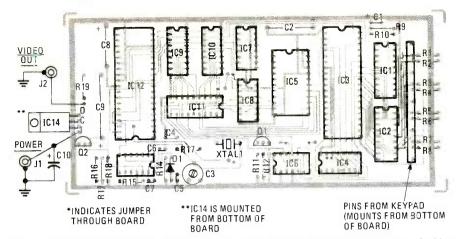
VOLTAGE REGULATOR, IC14 should be mounted from "bottom" of board and attached to vertical wall of enclosure. This will provide both heat-sinking action and a connection between chassis and board grounds.
